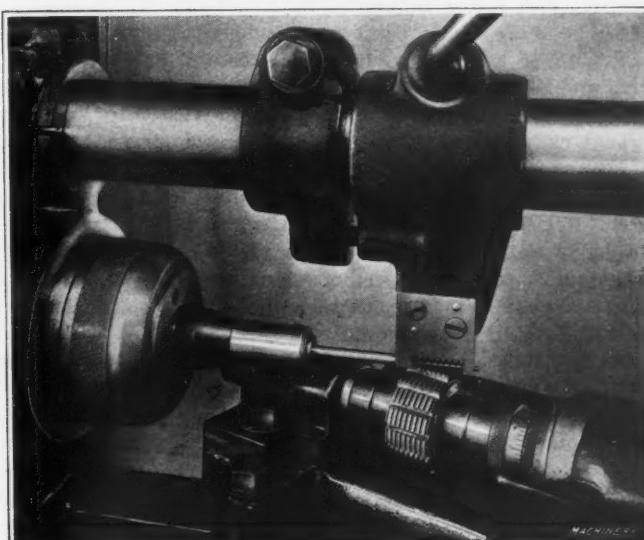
Barber-Colman Gear-hobbing Machine milling a Worm Thread on the End of a Slender Spindle
